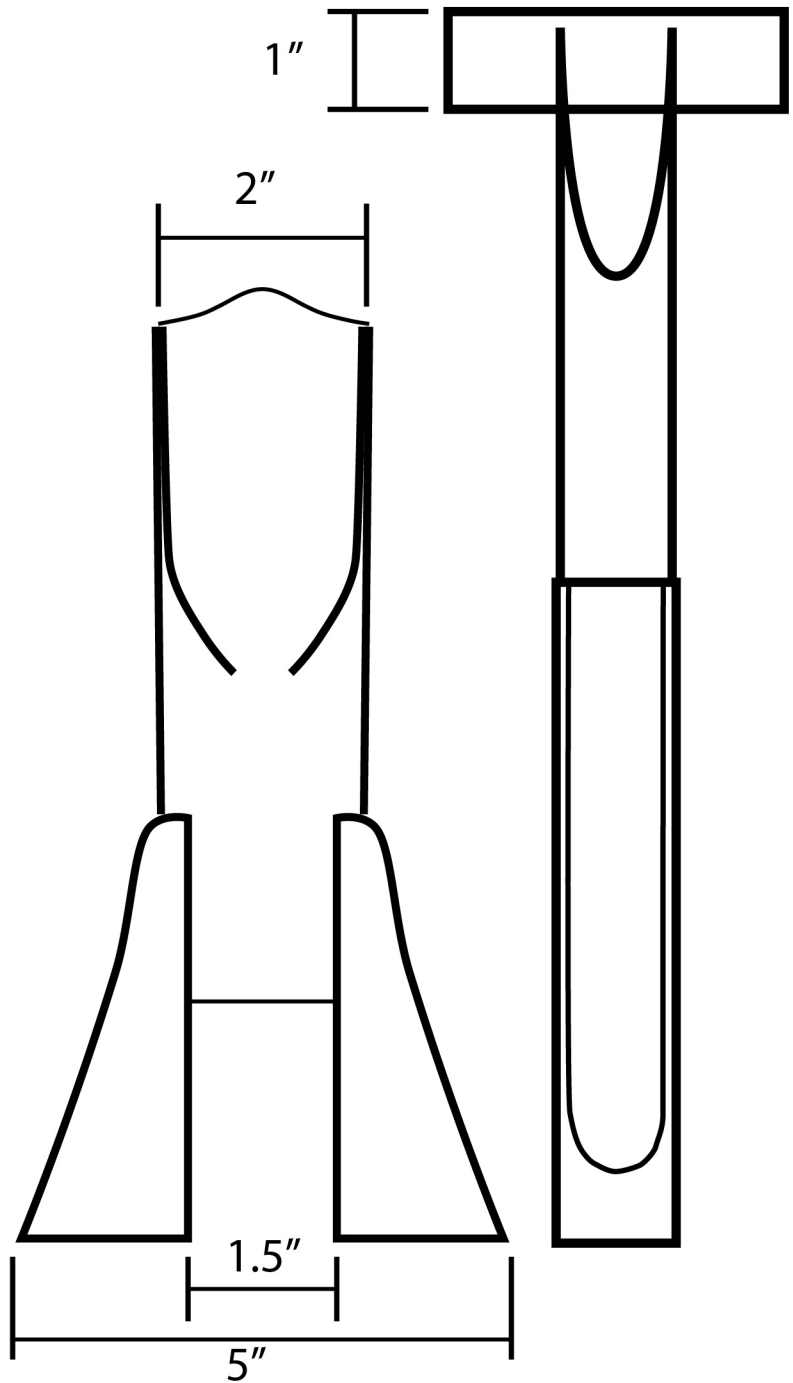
Technical Drawing of Front View With 1/8 Scale Dimensions
